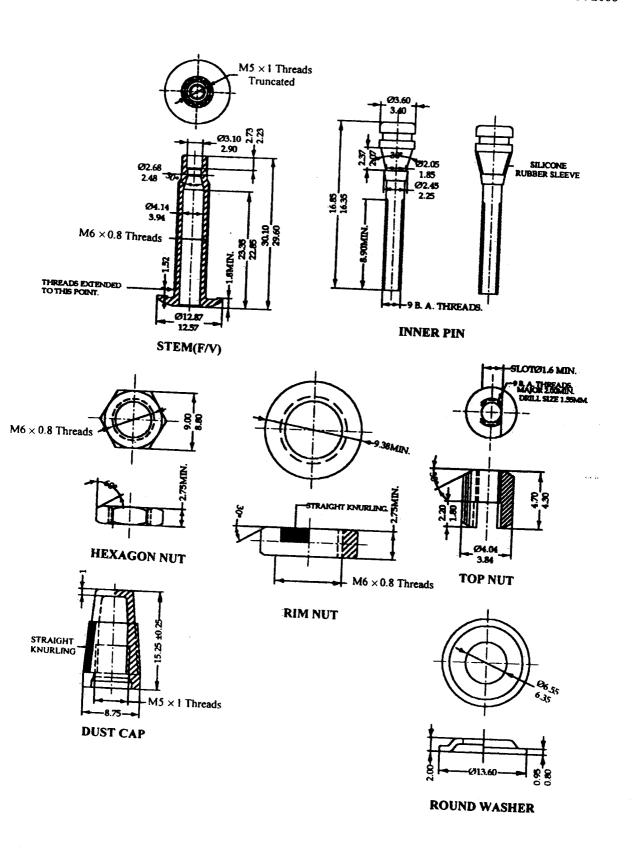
FRENCH VALVE FOR JOINTED TUBE
